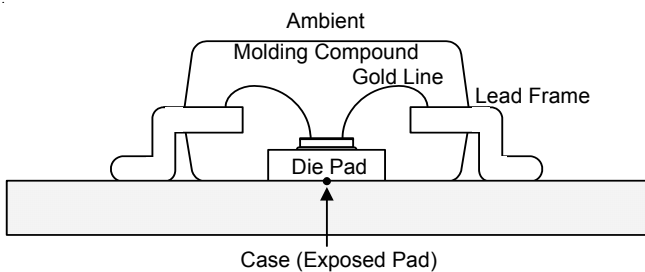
SOP-8 (Exposed Pad) Package Sectional Drawing
